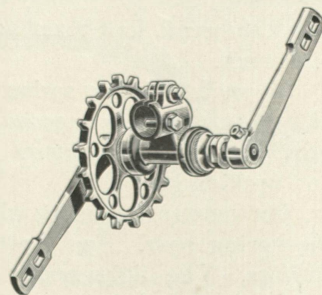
SAFETY CRANK HANGER AND CRANKS.
